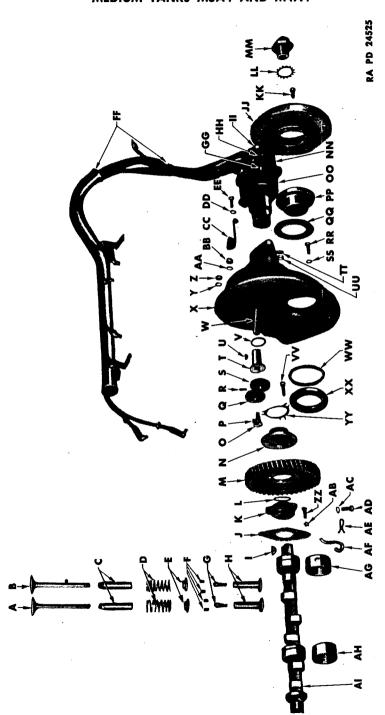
Engine Valve Mechanism, Gear Case And Attaching Parts (Single Water Pump Type), Partially Exploded
